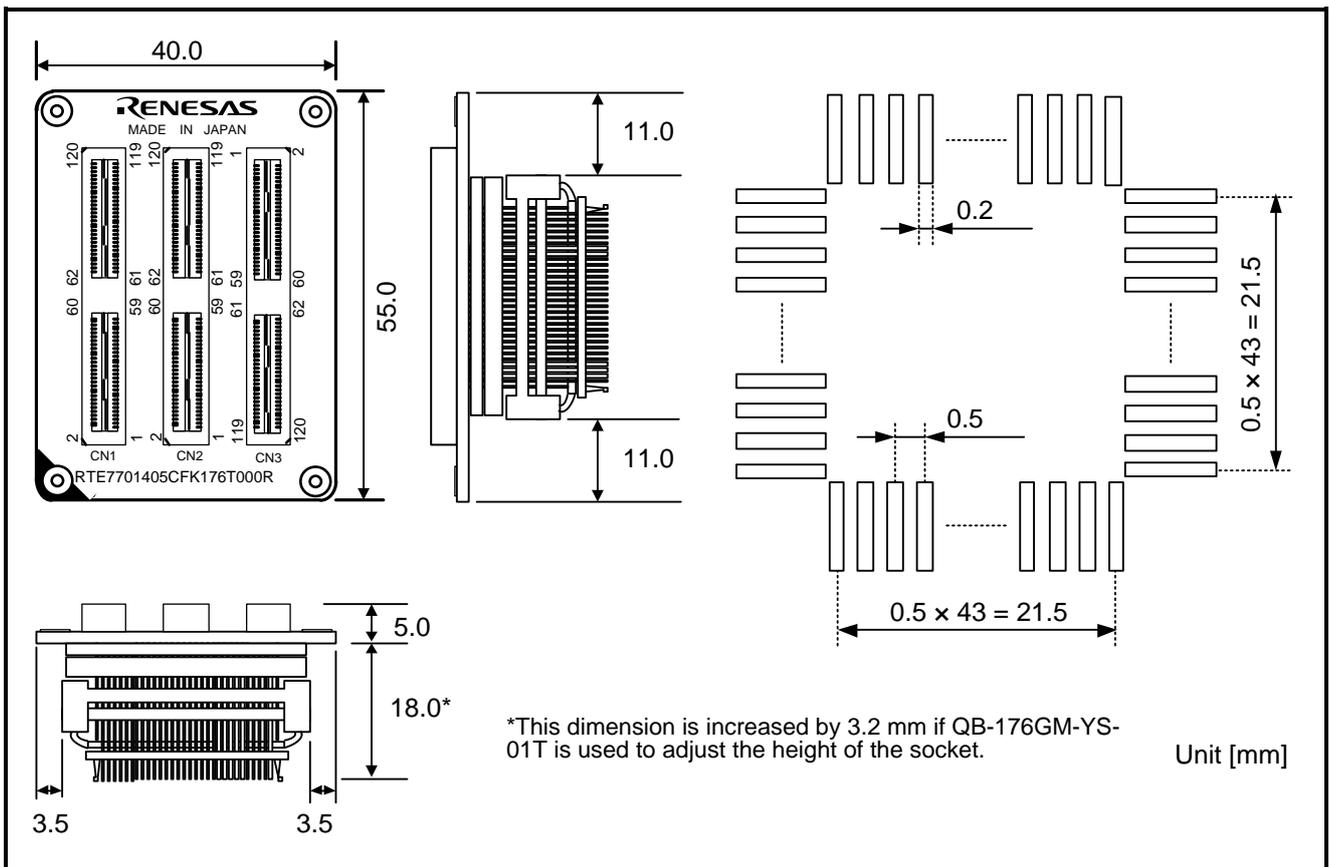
Drawing with Dimensions and a Pad Pattern for Reference
